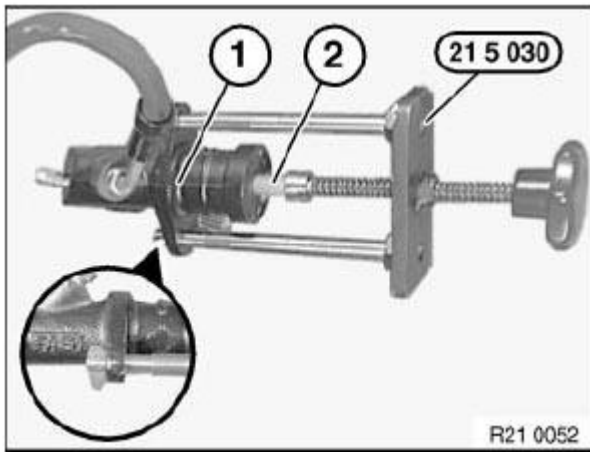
Fitting Special Tool (21 5 030) On Clutch Slave Cylinder
